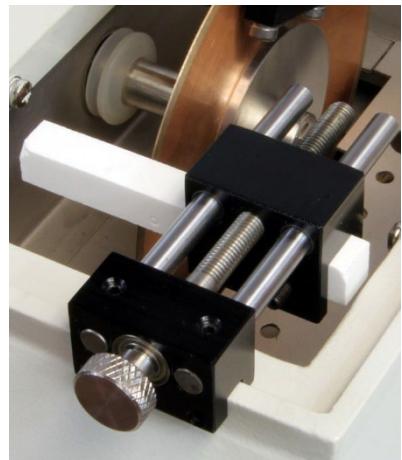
Proper dressing fixturing will minimize damage to the wafering blade.
